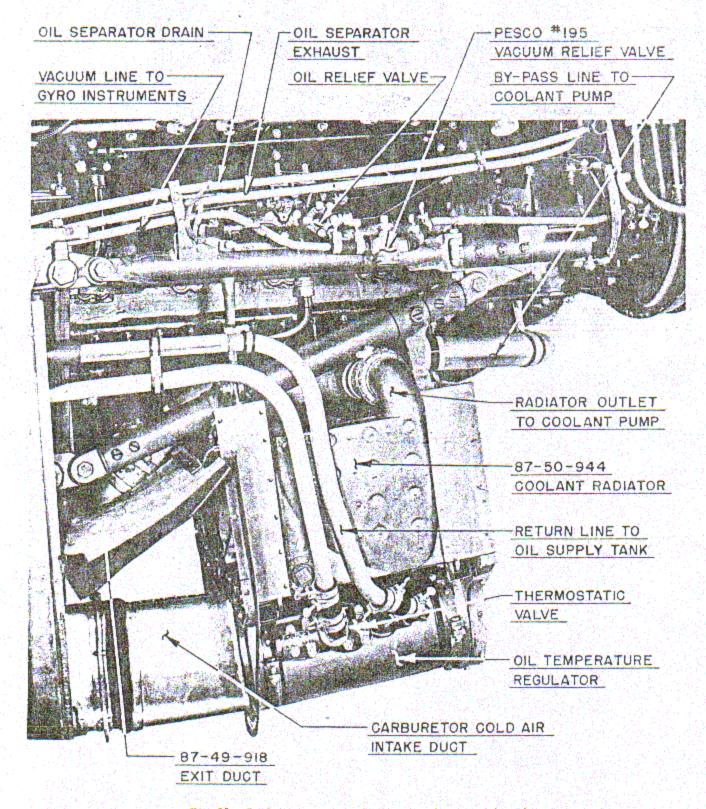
Coolant, vacuum and oil system lines - right side.
